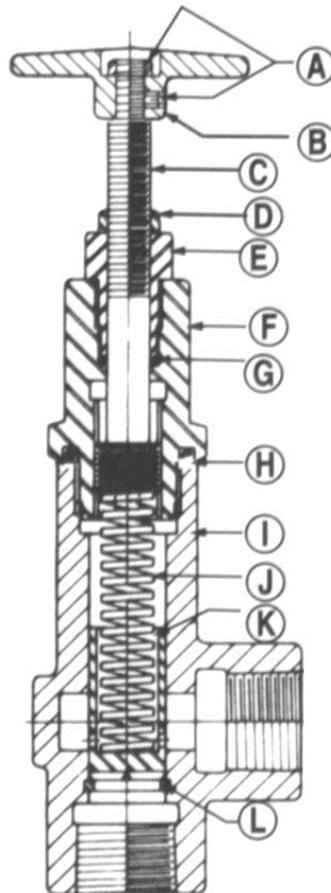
Cross-Sectional View of a Pressure Relief Valve
